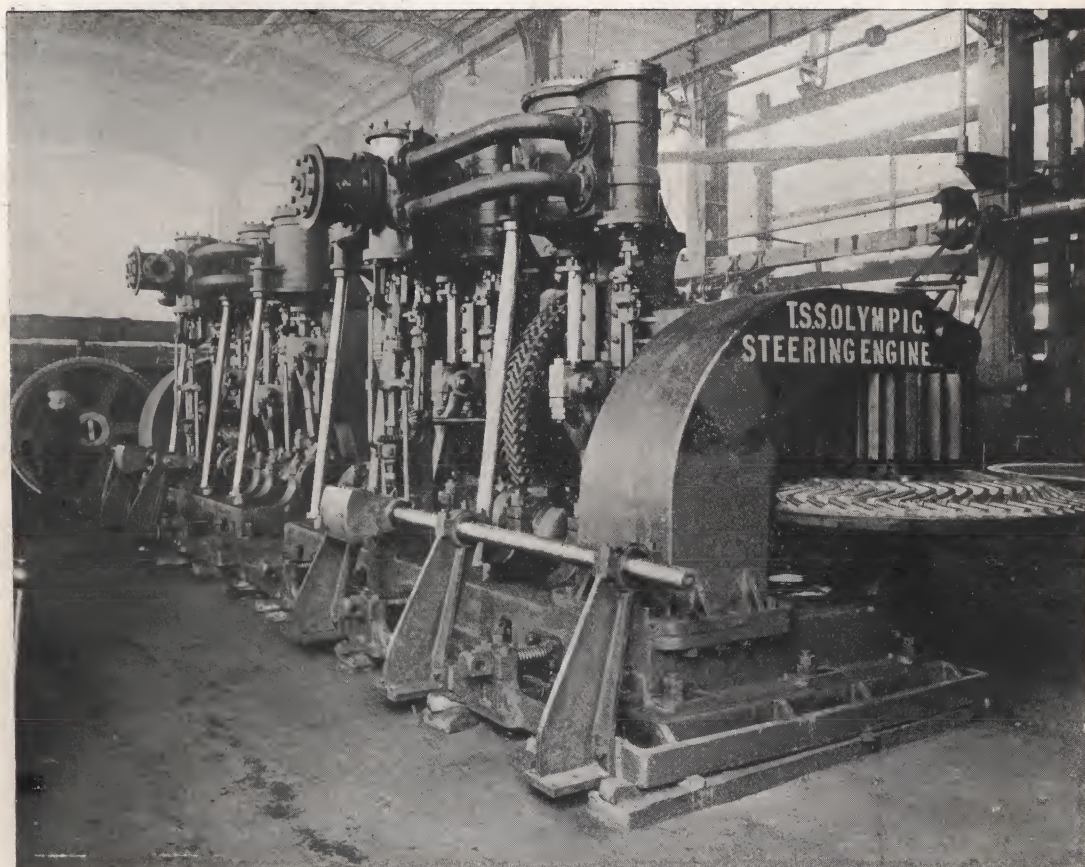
Steam Steering Engines with Spur and Bevel Gearing.
